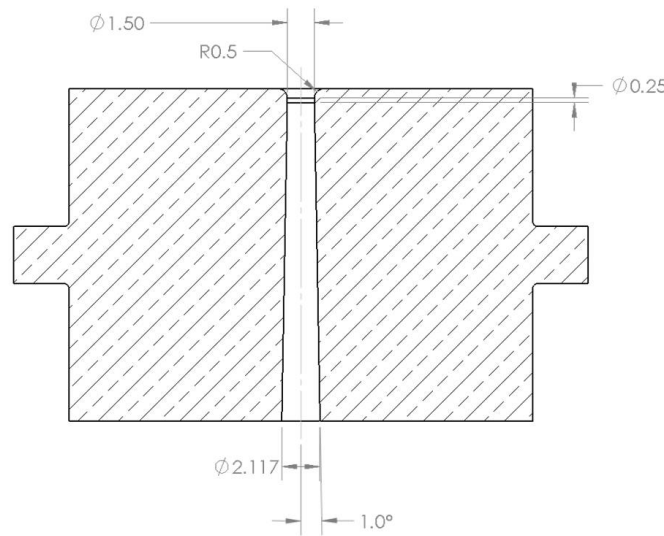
Cross-section of the novel injector prototype design (dimensions in mm).
